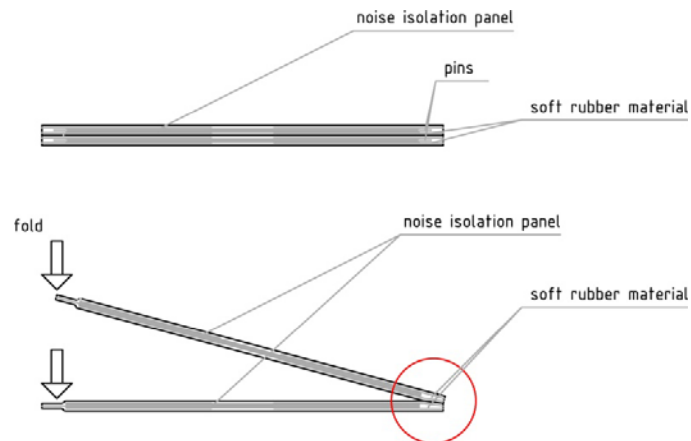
Two Parts Fold Together, drawing © LSG/Imhof
